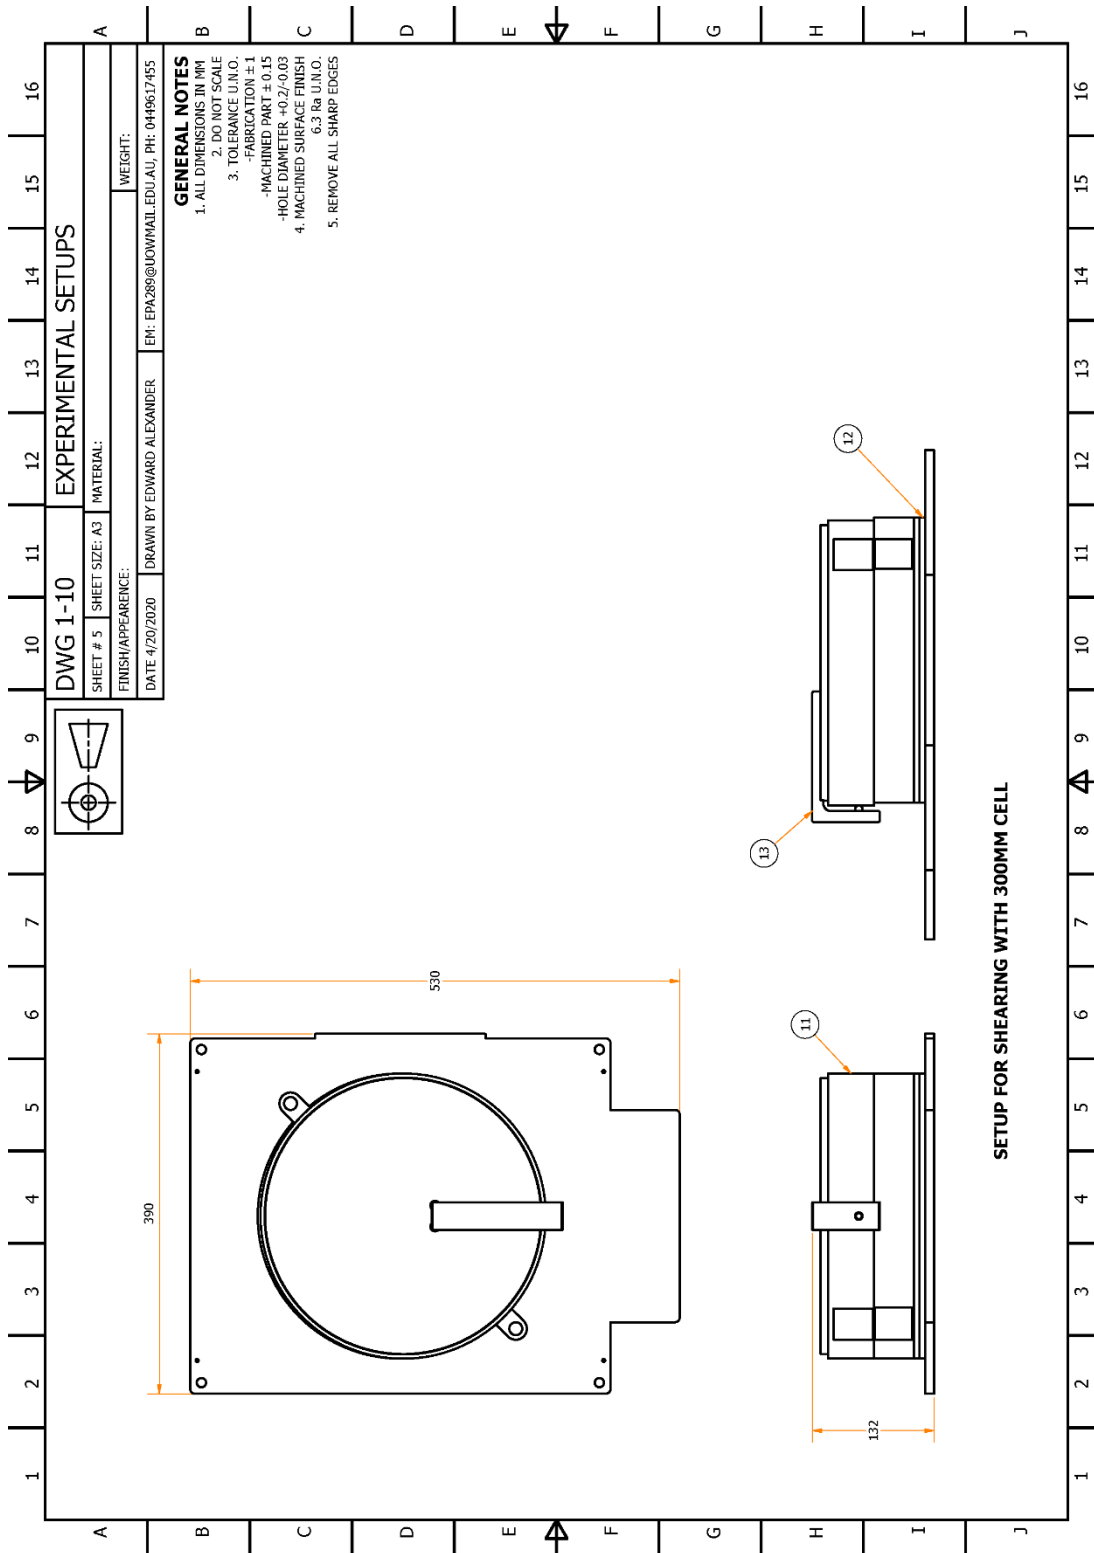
Drawing of set-up for shearing with 300 mm ID cell
